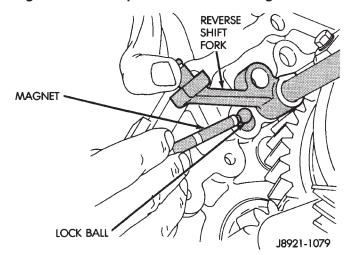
Install Fifth Gear Shift Rail Lock Ball
